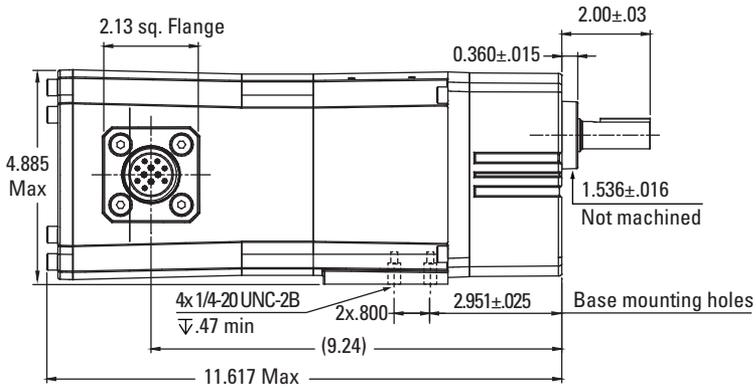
Dimensions for Standard 34B6BXBL Motor
